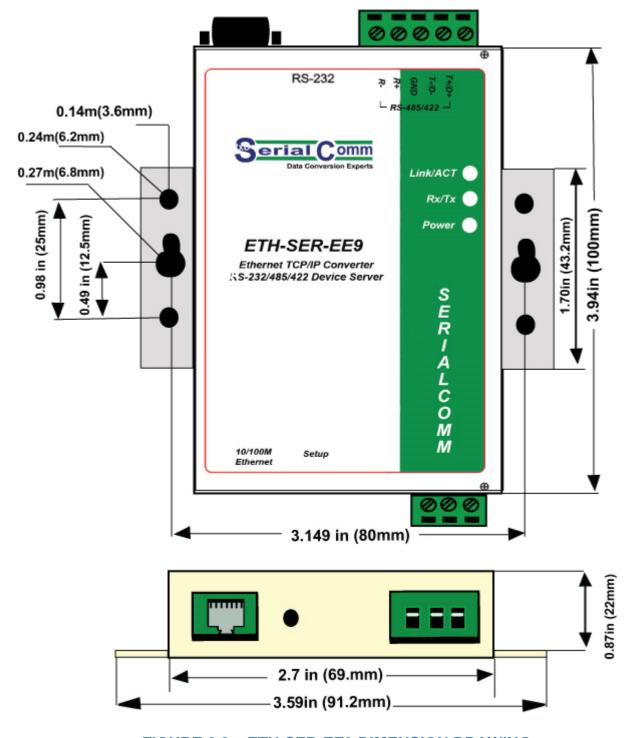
ETH-SER-EE9 DIMENSION DRAWING
